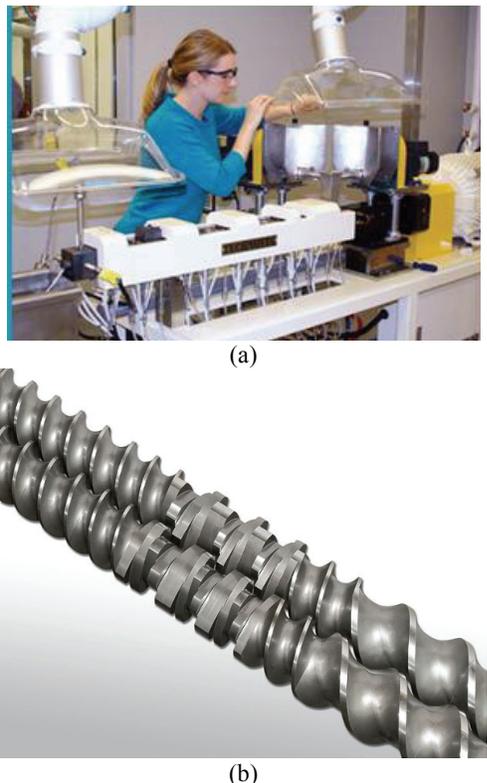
Compounding using a high speed twin screw: (a) 15-mm twin screw extruder and (b) modified screw design for the twin screw extruder.
